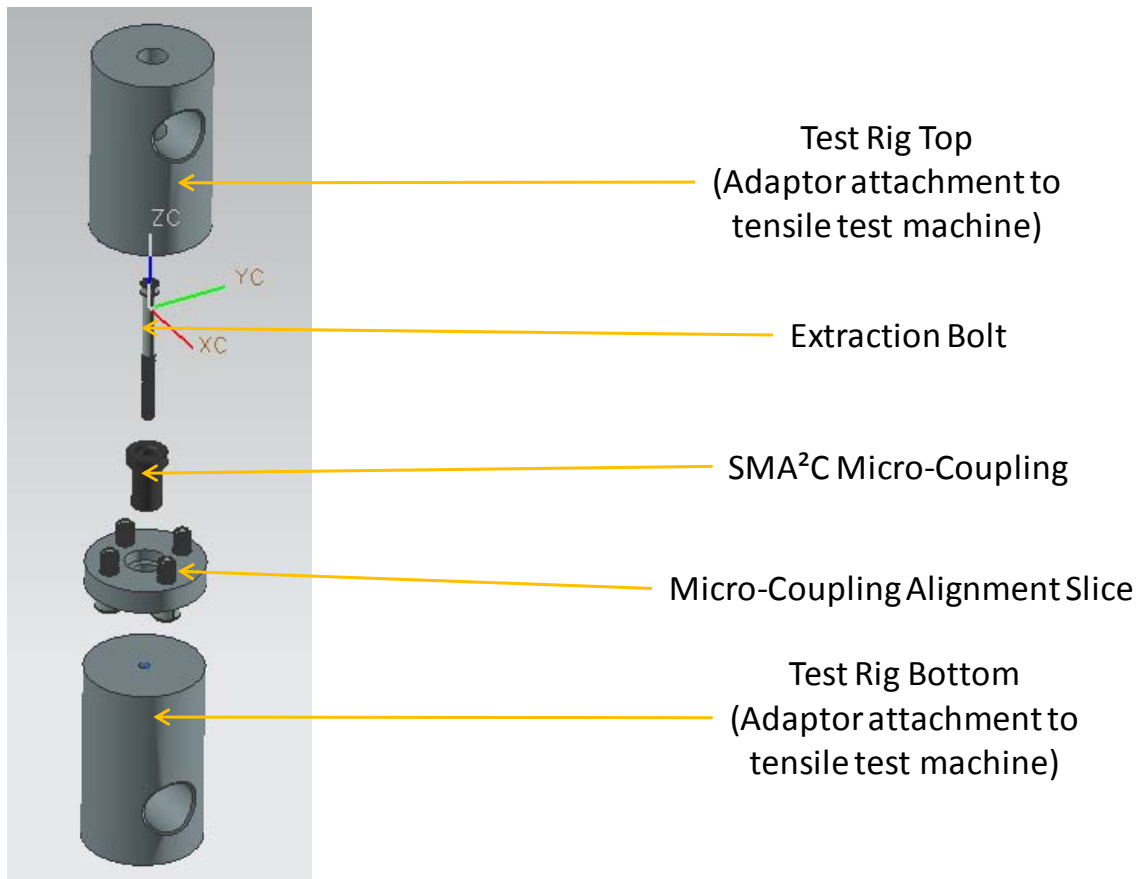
Component View of SMA²C Micro-Coupling Load Test Rig
